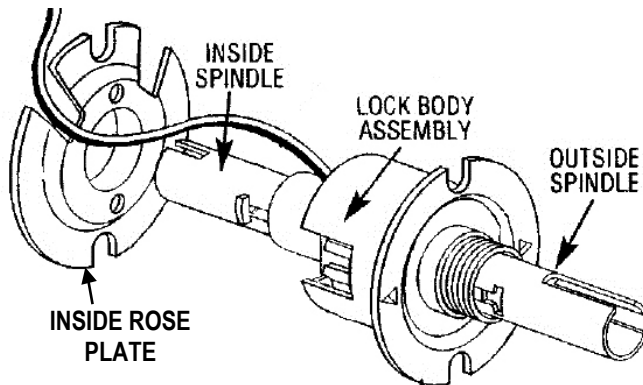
Ga: GENERAL EXPLODED VIEW OF CYLINDRICAL LOCK PARTS
